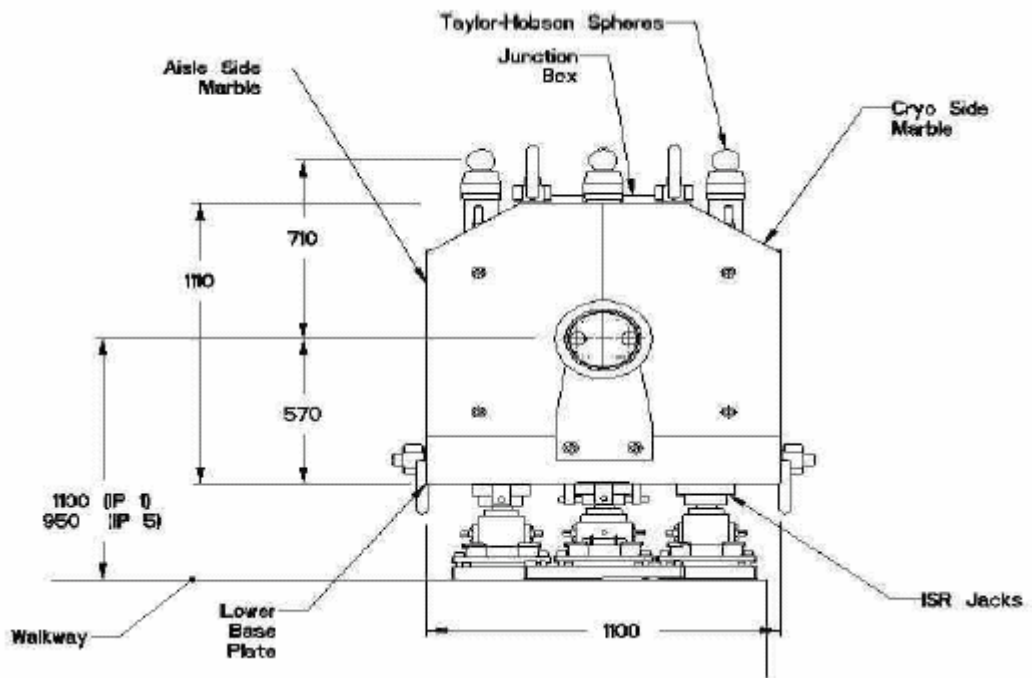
TAN End View - IP Side (dimensions in mm)
